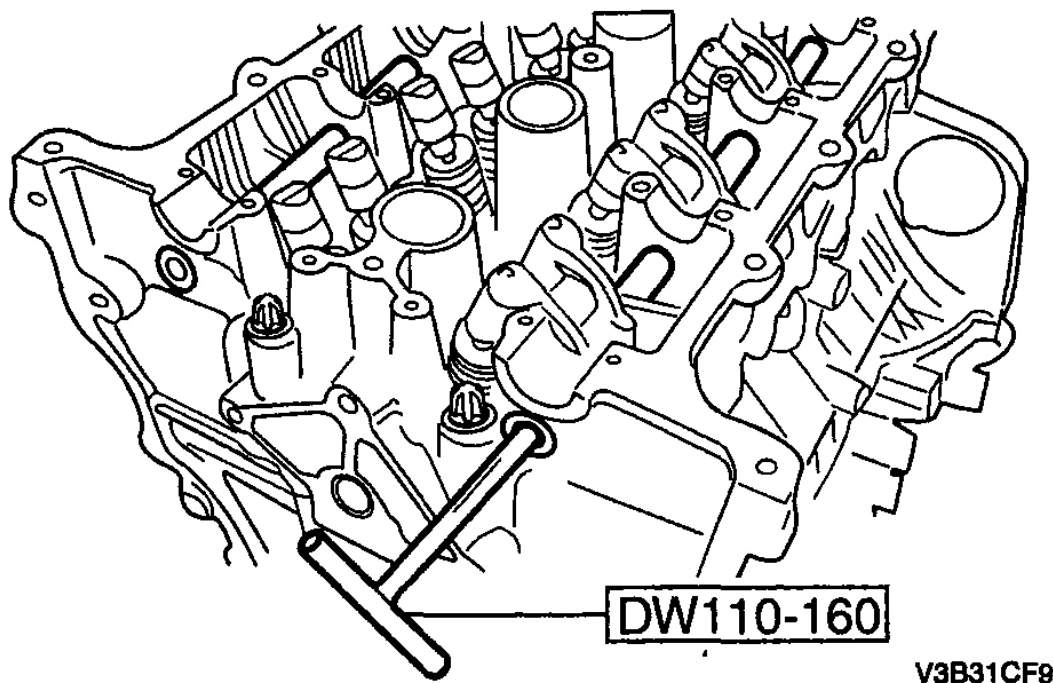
Removing Front And Rear Rocker Arm Shafts Using Rocker Arm Shaft Installer / Remover DW110-160
